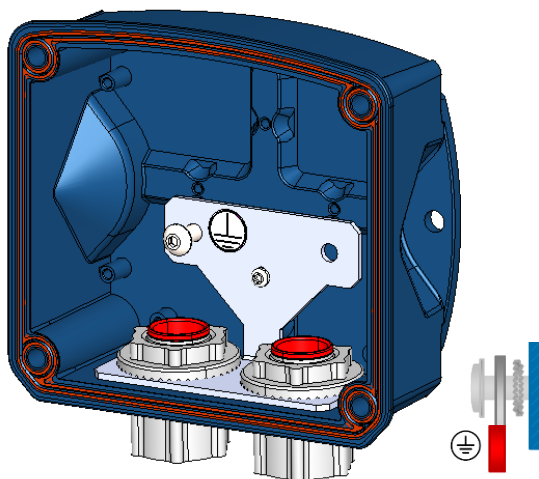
Protective Earth (PE) connection on conduit hub grounding plate
